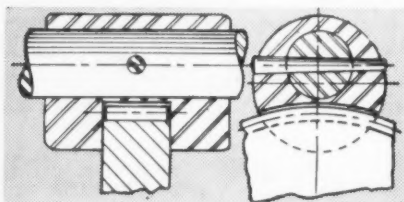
The particular shifting shoe shown in this sketch is of unusually compact design.
